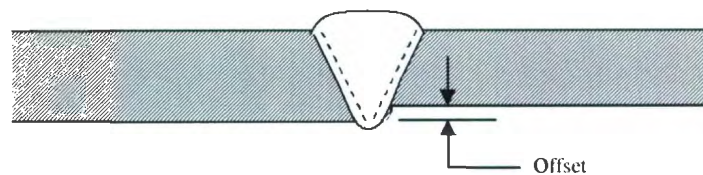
Offset or mismatch in a welding joint
